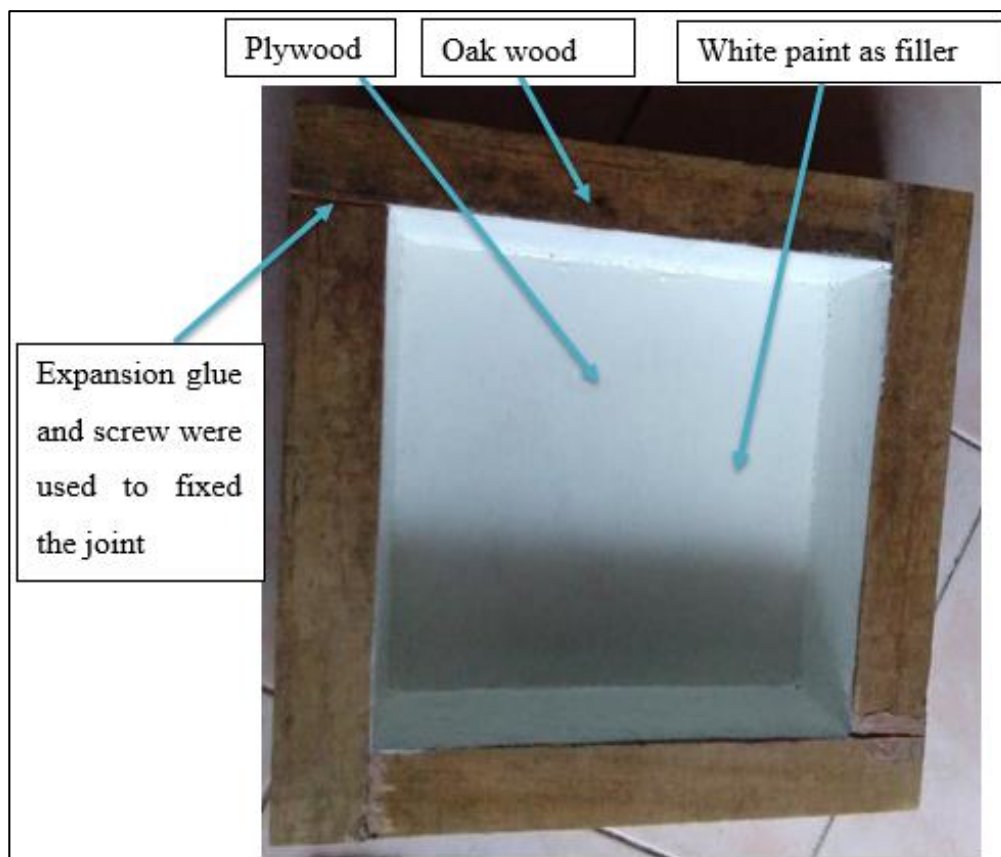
Fabrication of vacuum cavity box using wood (cover of the box not installed).
